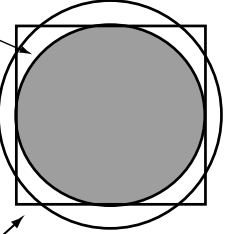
Footprint - 5 mils stencil -non solder mask defined
